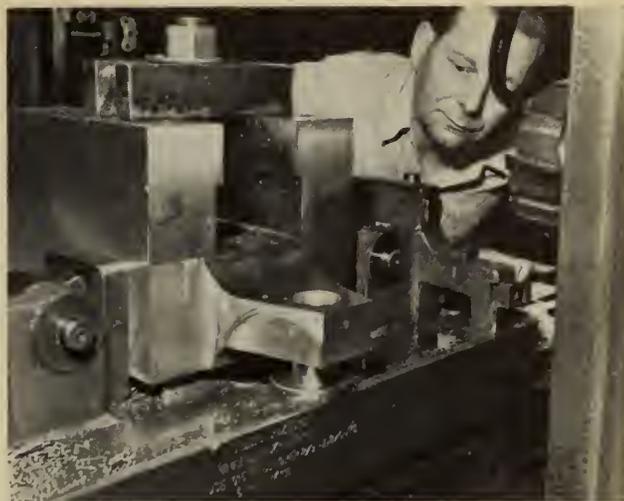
Milling fixture for breech ring, showing hardened blocks affixed for easy adjustment of milling cutter position.
